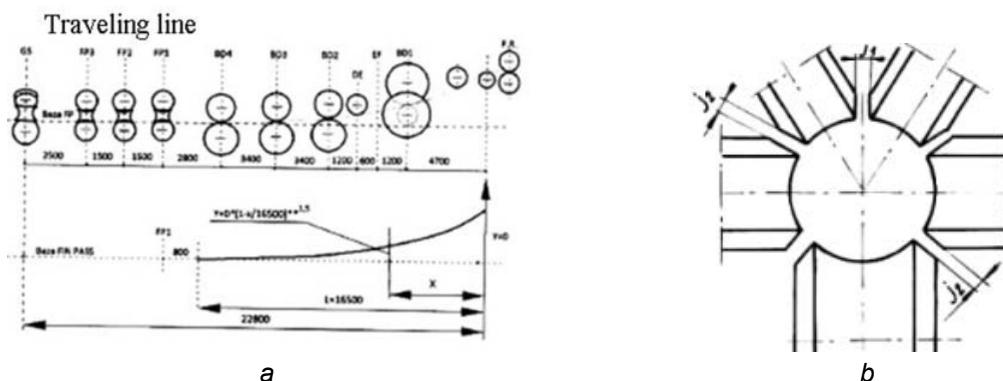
Technological line for contact welded pipes production b. final forming of pipe before welding b. formed pipe before HFCW
